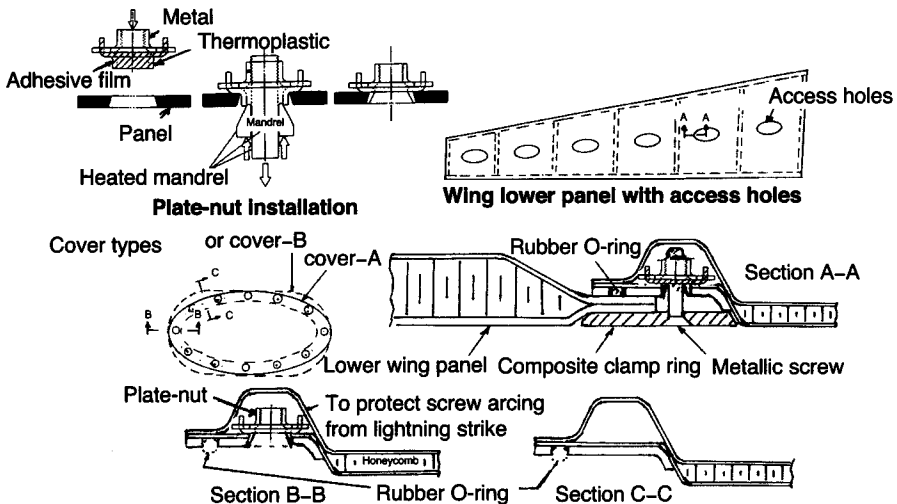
Wing Lower Honeycomb Panel with Access Holes
